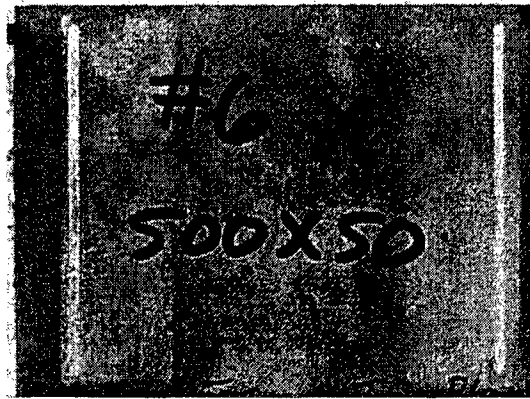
Parallel μ Heat Exchange Specimen After Diffusion Bonding and Machining
